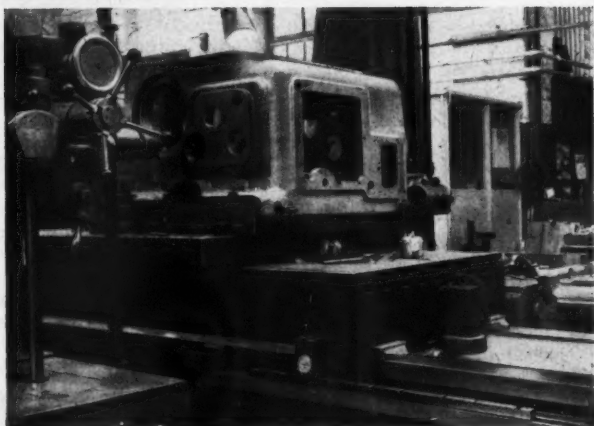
Close-up view of the set-up, on one of a battery of Kearns S-type horizontal boring machines, which provides for finishing the axial and radial holes in the cam-lock noses for lathe spindles. The boring bar at the left is mounted in the main spindle of the Kearns machine, and the bar at the right is fitted to an independently-driven spindle, mounted in a slide which has power traverse on guideways on the fixture base. The lathe spindle is located by a plunger that engages the rough-machined axial holes
